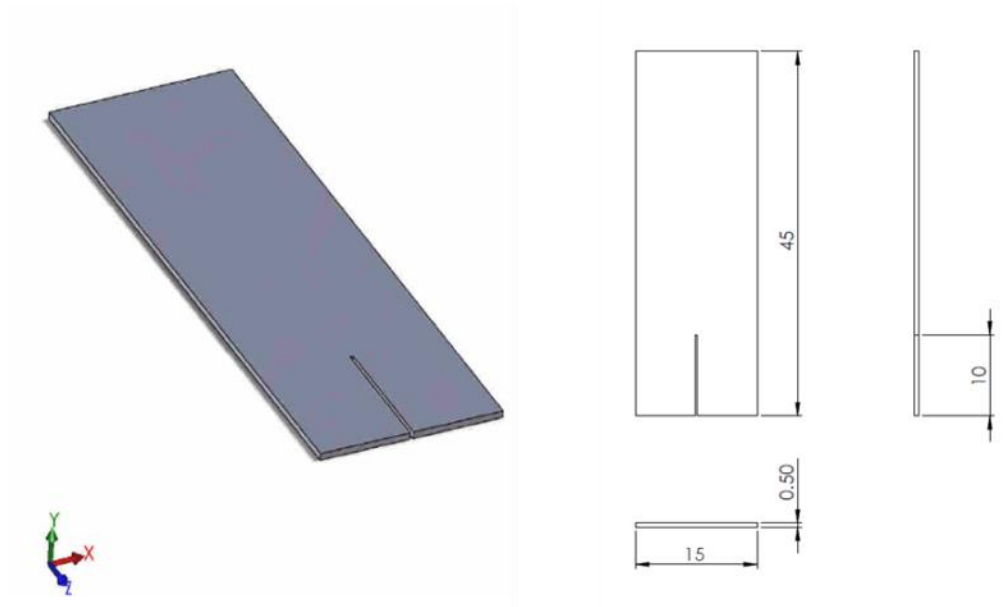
Drawing depicting the geometry of the PCD specimens.
